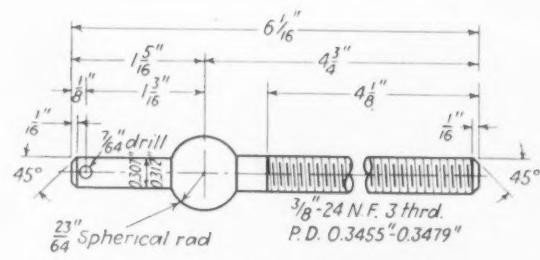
The ball on this rod is produced by heading, and short end is extruded.
